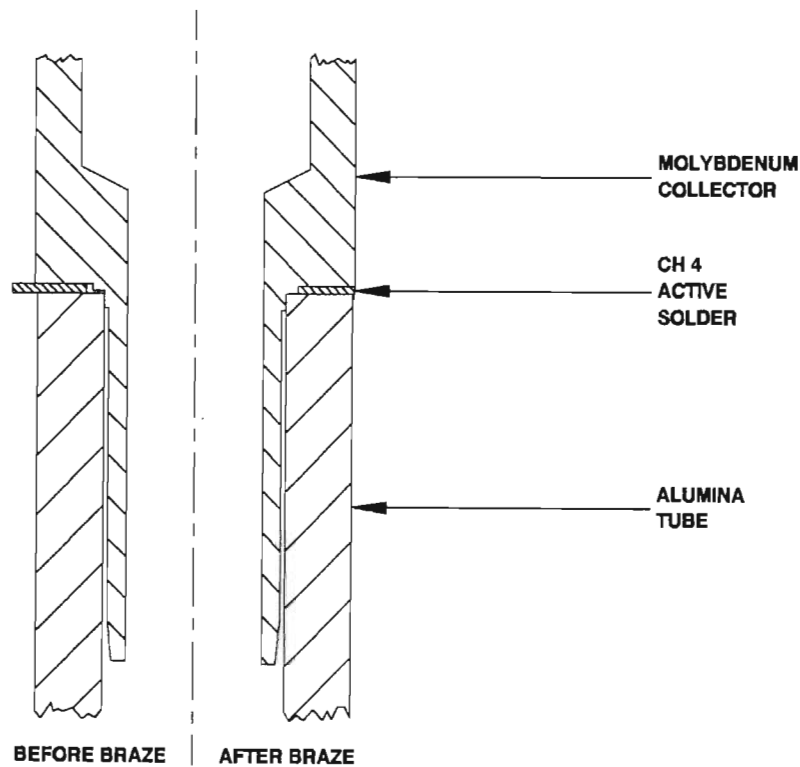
Cross Sections of the Collector/Alumina Tube Joint
